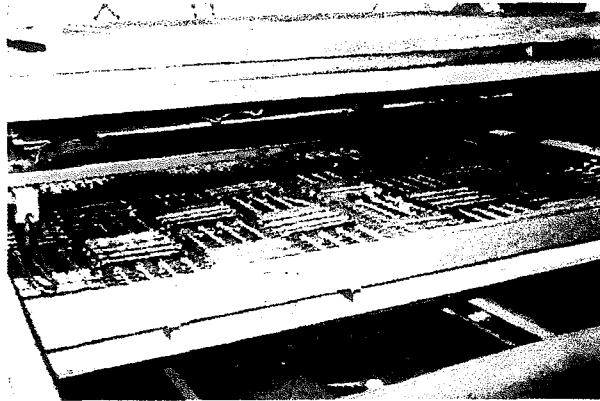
7 : Zone-Heaters Incorporated in a Thermofforming Machine.
